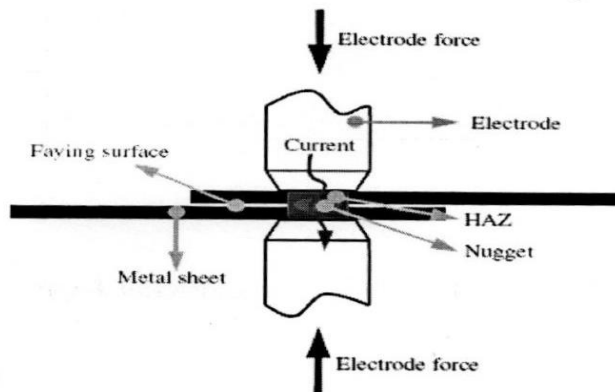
Resistance spot welding machine with work [4]
